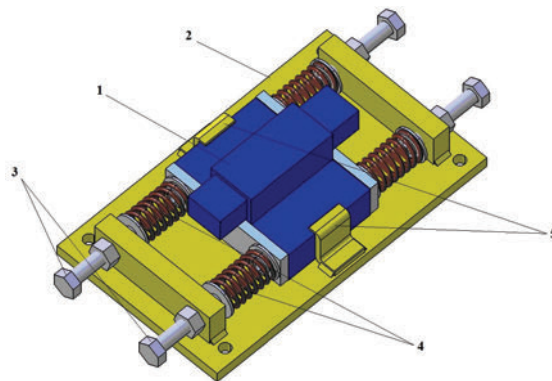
Valve holder: 1 – hydraulic valve (distributor), 2 – holder base, 3 – spring pre-deflection bolts, 4 – springs, 5 – securing catches
